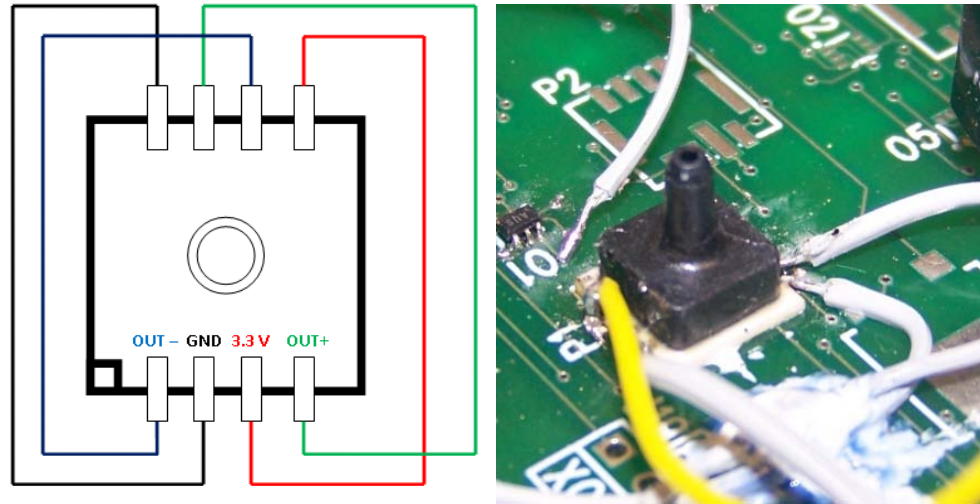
Completed Pressure Sensor schematic with picture of terminal on Sub-Hub PCB.
